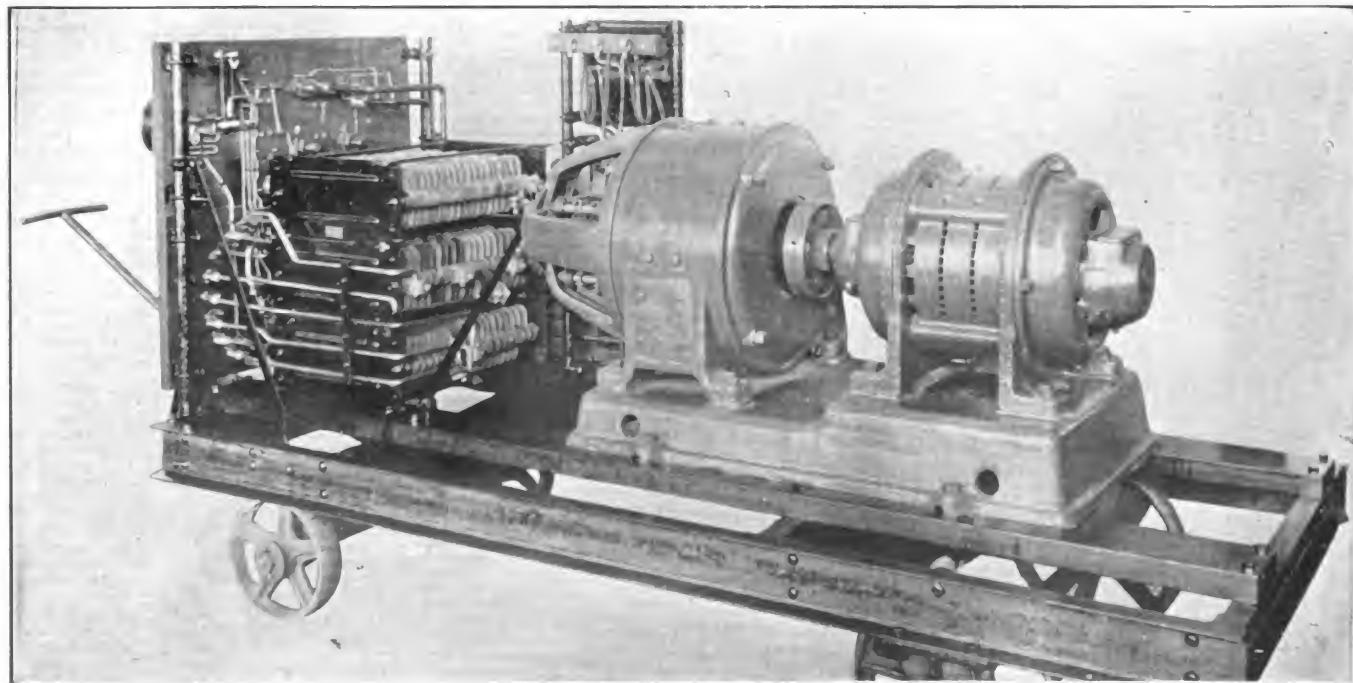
Portable arc welding set, consisting of welding and generator panel, connections, and starting compensator, on light steel truck with wheels
